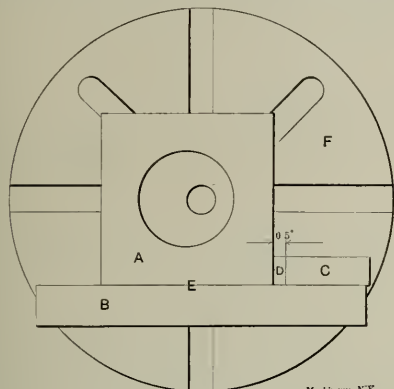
Method of Boring Fixture for Grinding Crankshaft.
